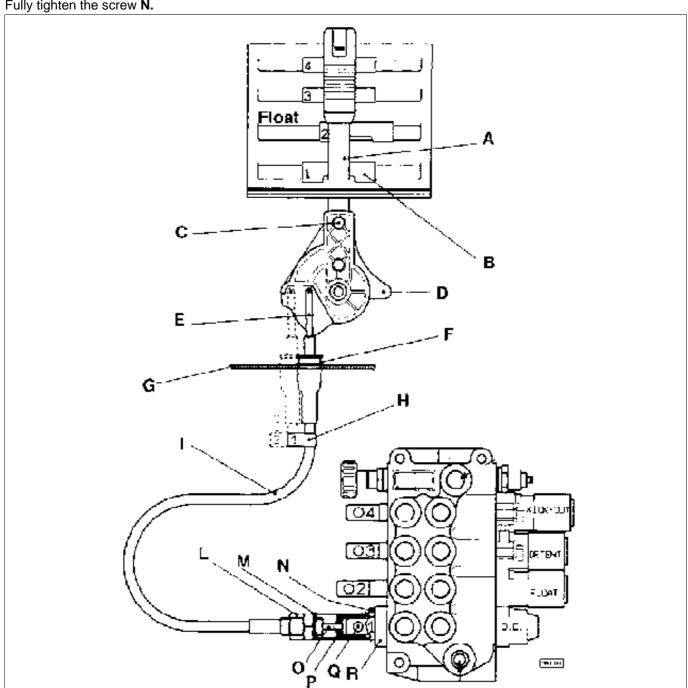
Connection of auxiliary hydraulic spool valve bowden cables.
